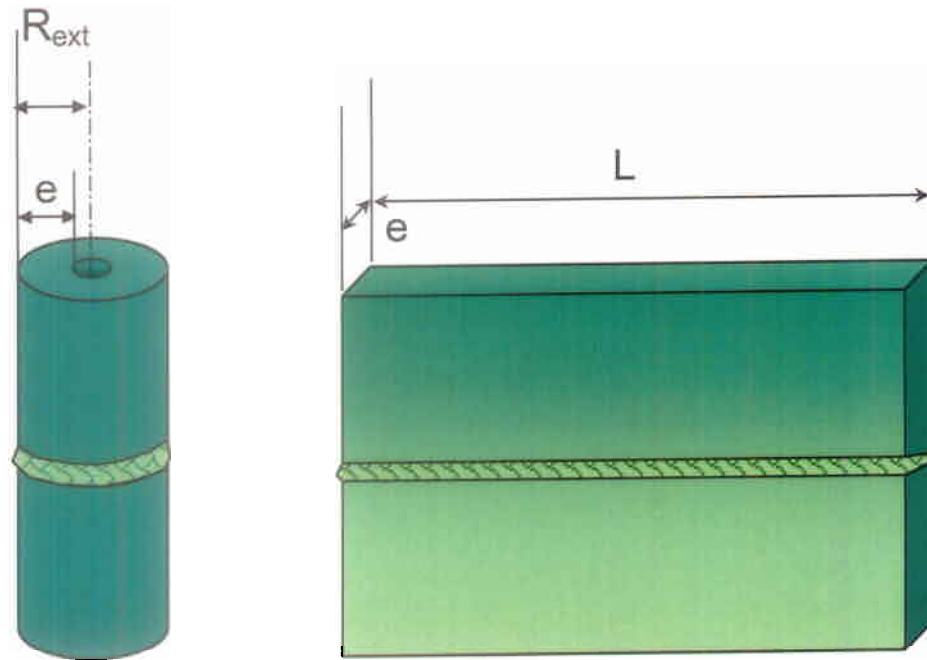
schema of circumferential weld in tube, and plate with weld
